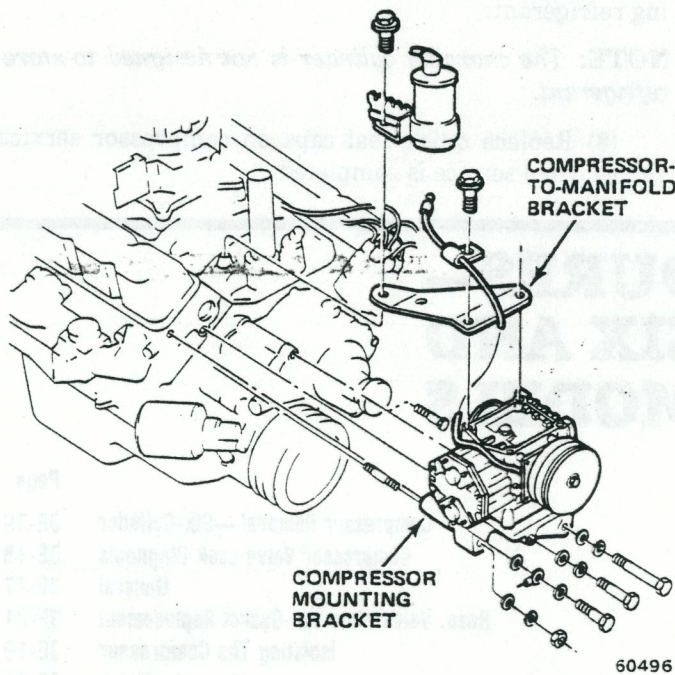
E-19 Compressor Mounting—49-State Eight-Cylinder Engine
